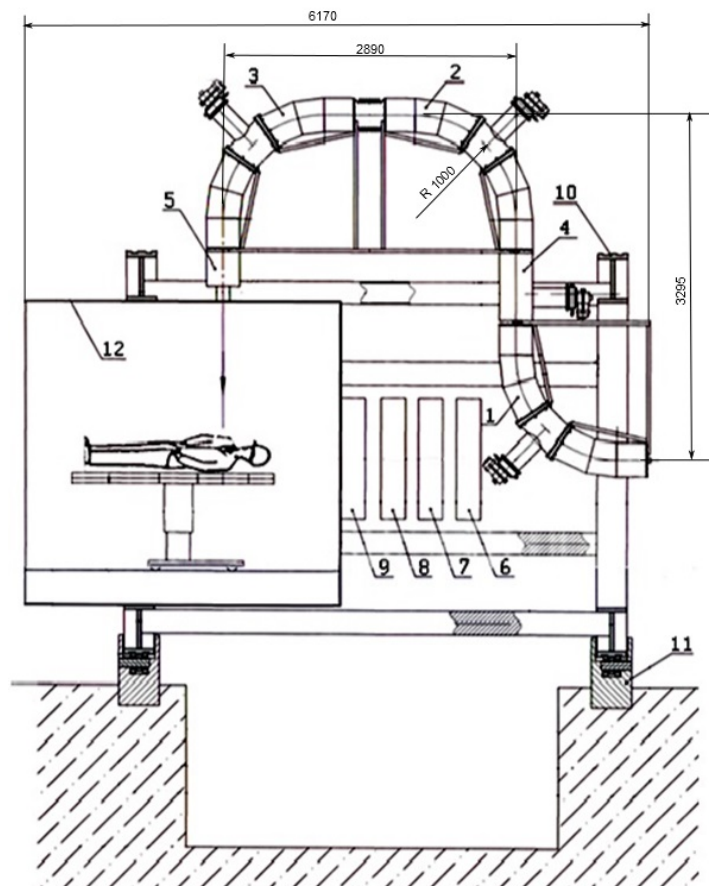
Side view of superconducting gantry (6 T) (1-3 dipolar magnets, 4 - focusing magnet, 5 - conventional scanning magnet, 6 - sealing of helium tubes, 7 - sealing of vacuum tube, 8 - electric sliding connection, 9 - cryocoolers' wires, 10 - rotating frame, 11 - support of frame wheels, 12 - screen of a treatment room) [2]
